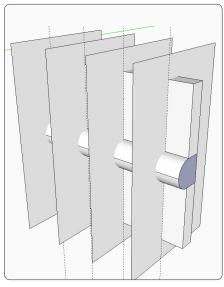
Divide the knuckle into equal segments, then draw and place cutting planes at the divisions.
